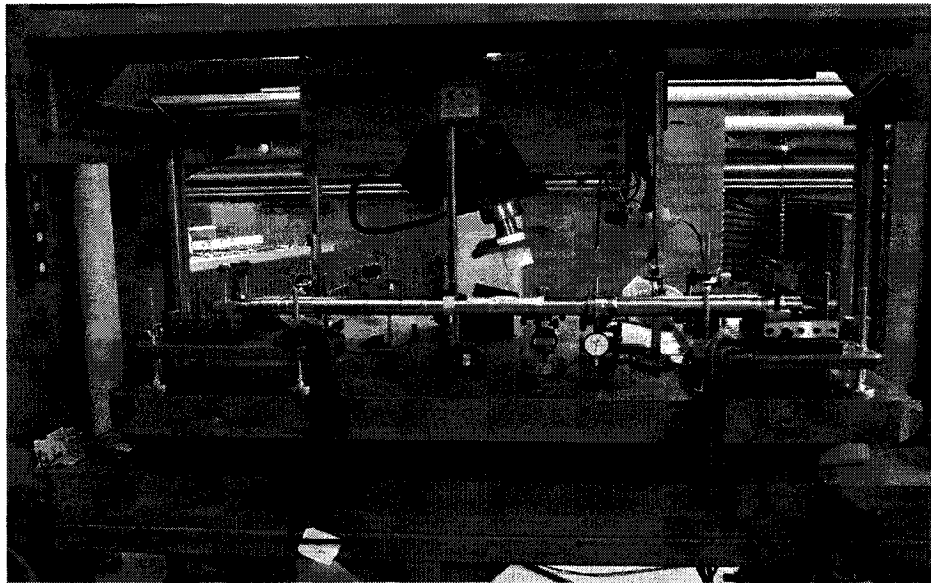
Setup shown on NRC's stir welding press
